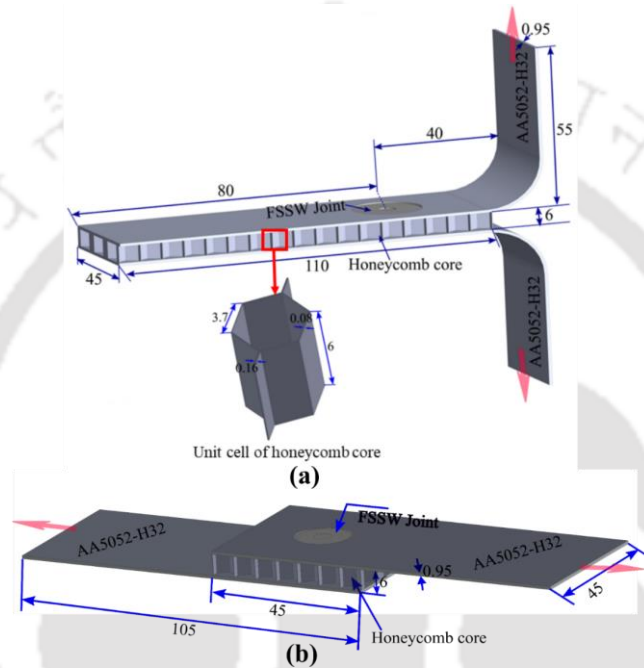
Schematic of (a) peel test specimen with honeycomb configuration (b) lap-shear test specimen (all dimensions are in mm)
